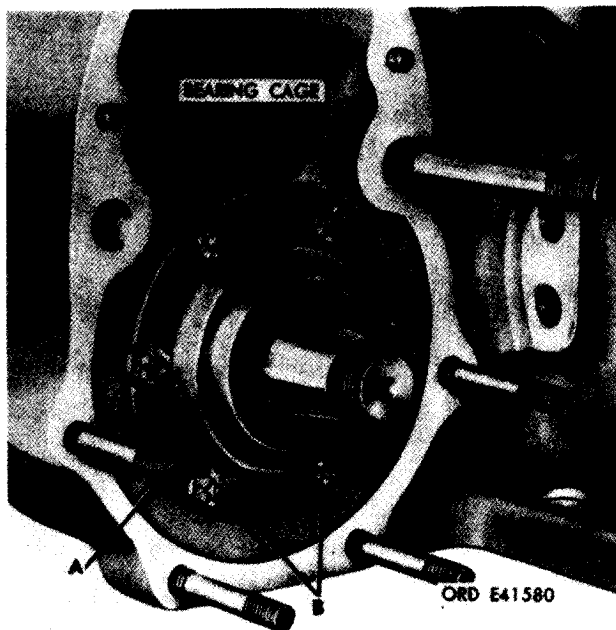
Removing or installing starter and generator idler gearshaft flange nuts.
